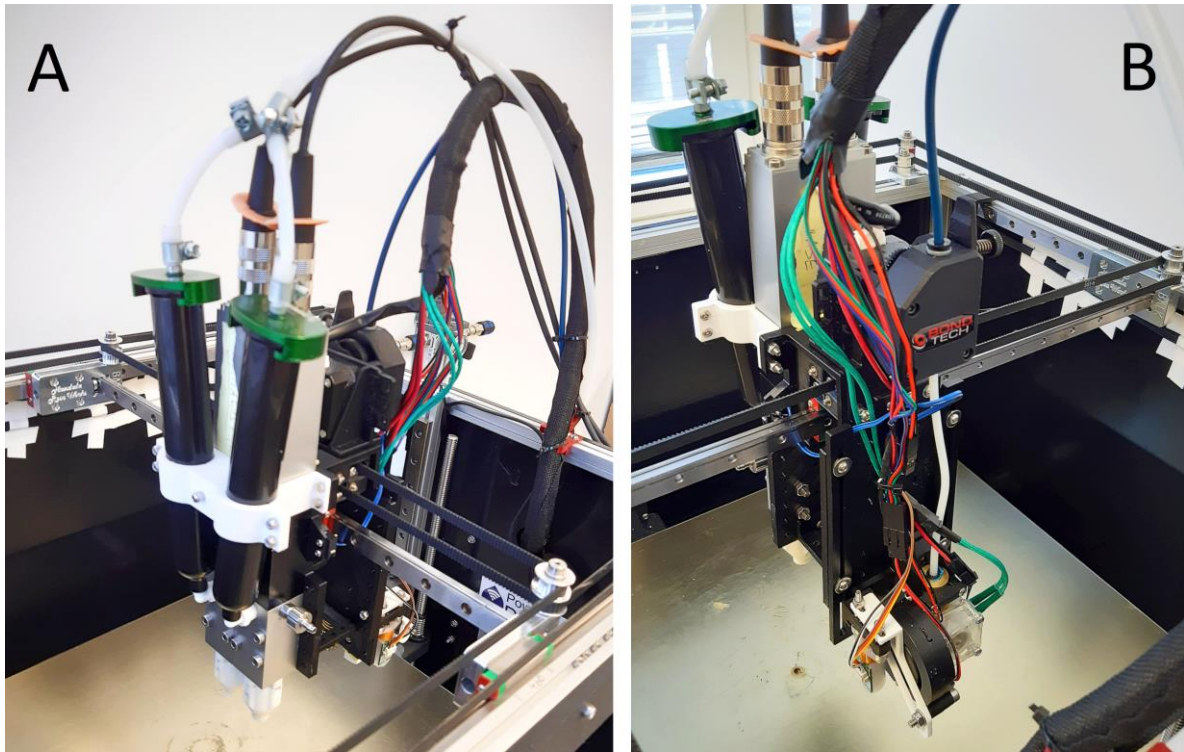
(A) Viscotec Vipro-HEAD 3/3 extruder with custom Luer-compatible endpieces; (B) the original E3D V6 filament extruder on the opposite side of the printhead carriage
